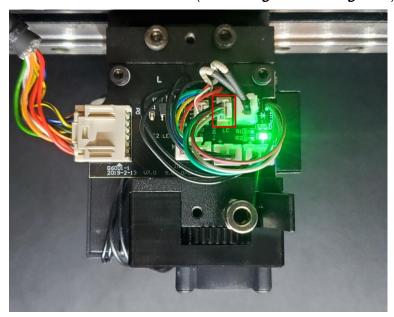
Auto-leveling assembly connector on the extruder controller board.
